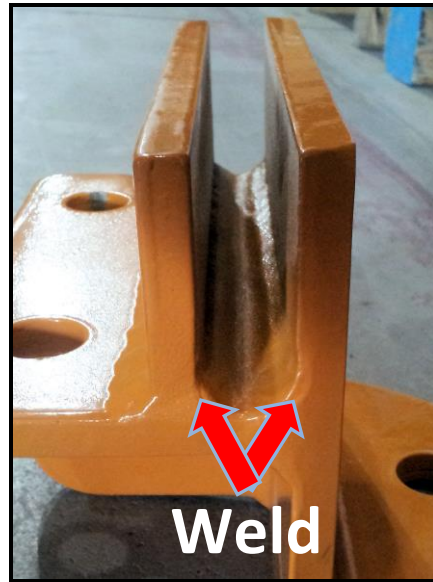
F-Clamp plate is fully welded on both sides
